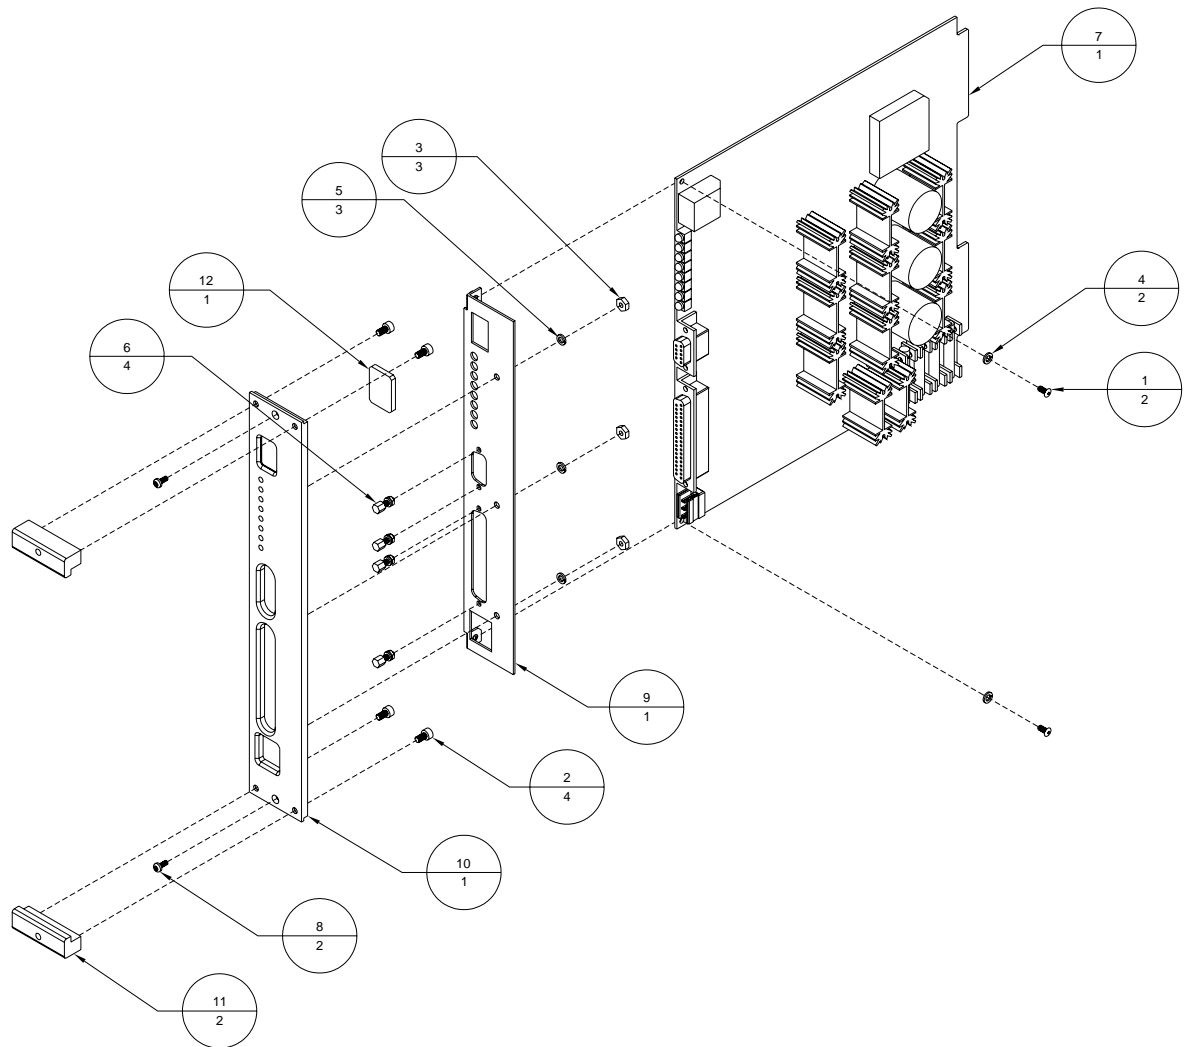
Head Control Card Assembly (BK-HCC-1A)
